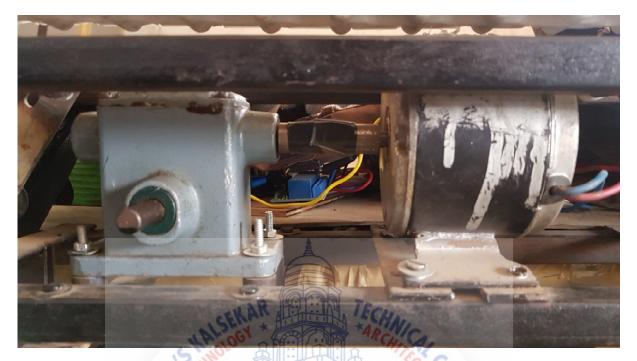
FIG: - ASSEMBLY OF MOTOR AND GEAR BOX
